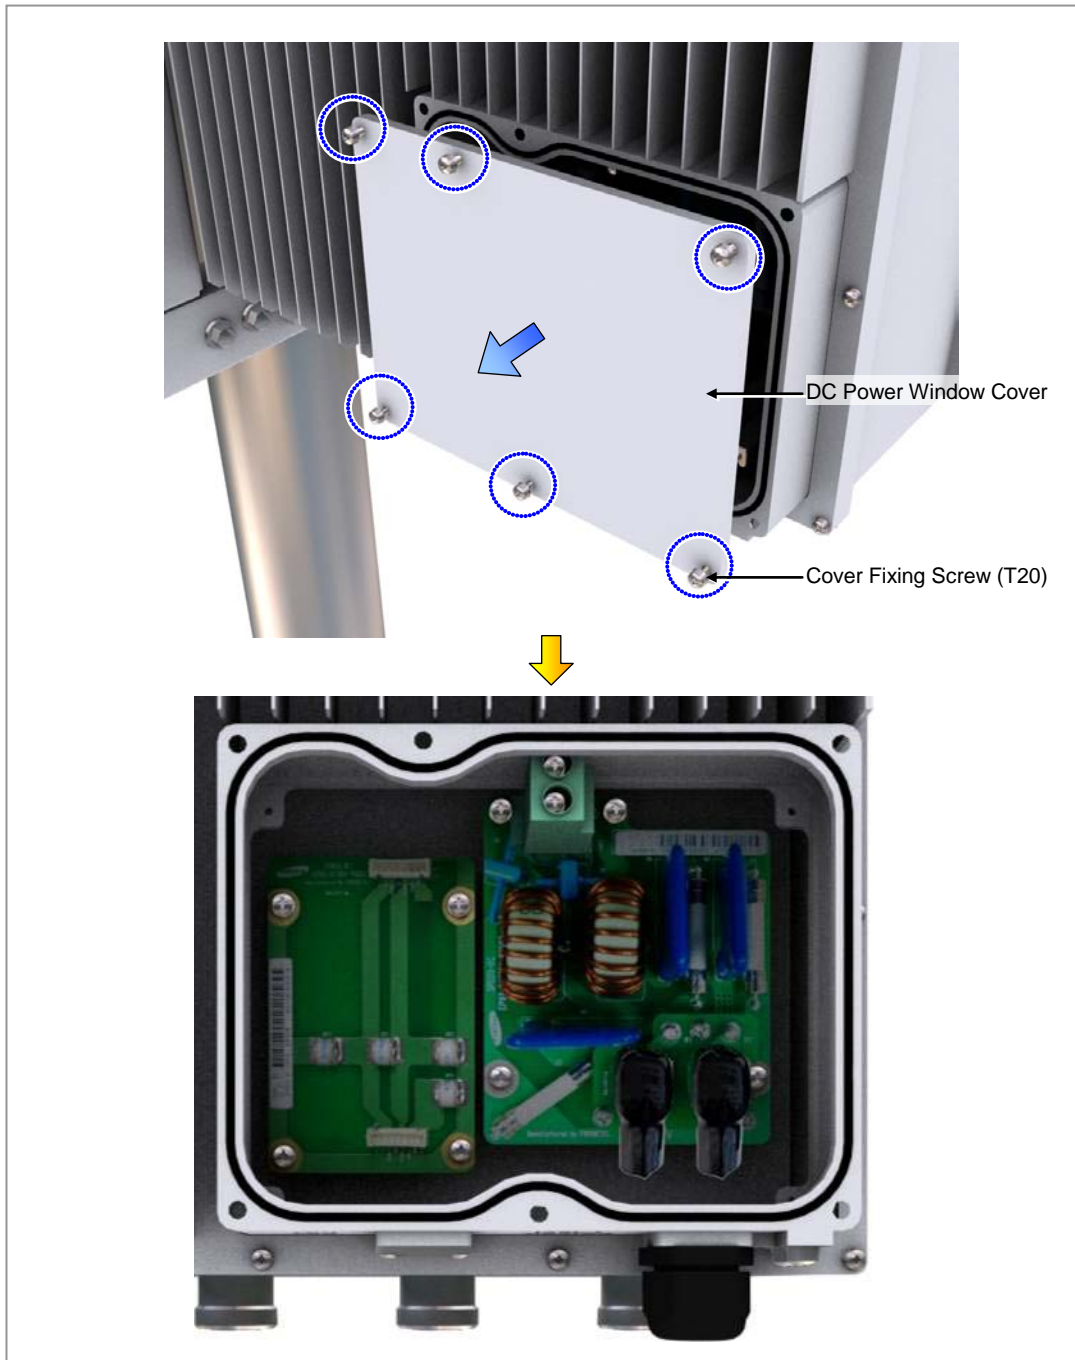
Connecting RRH-P4 power cable (AWG10) (1)
